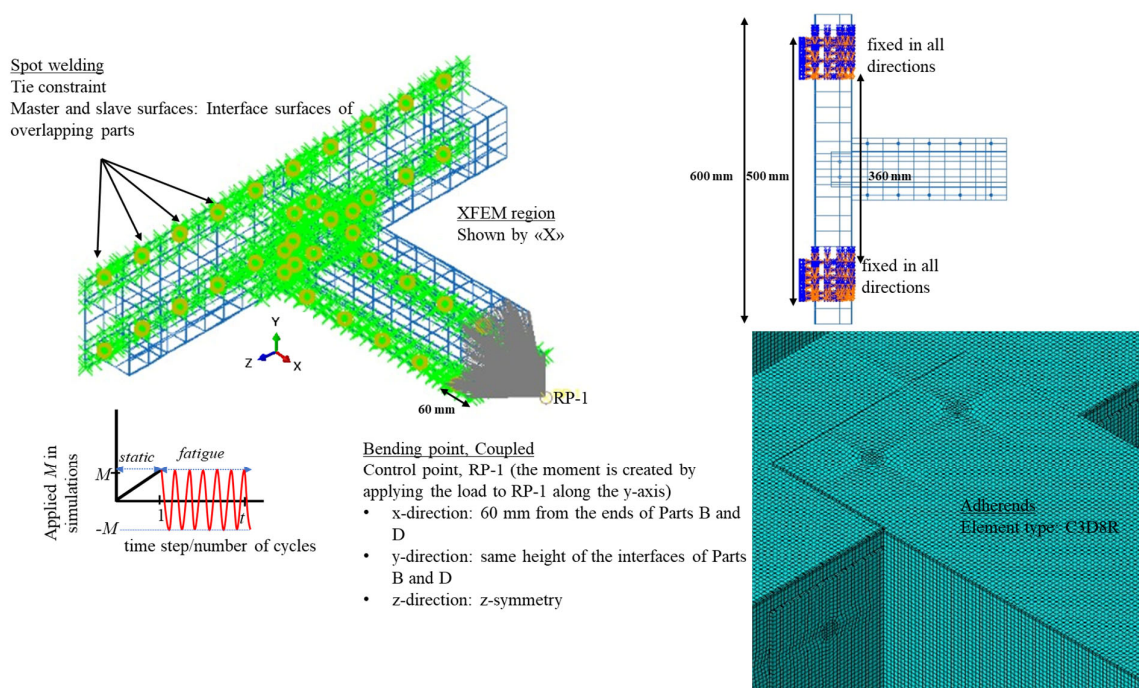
Geometric information on the T-profile assembly's component parts.
